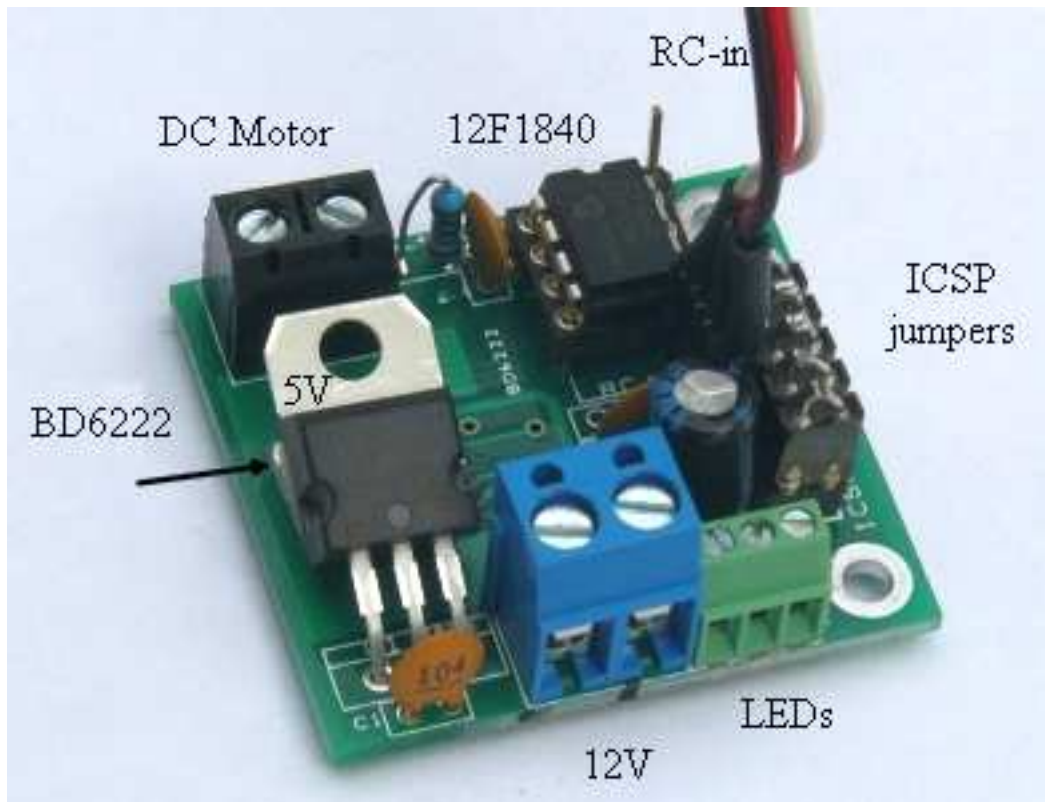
B. PCB with BD6222 bridge driver. Board size is 35.5x38 mm
